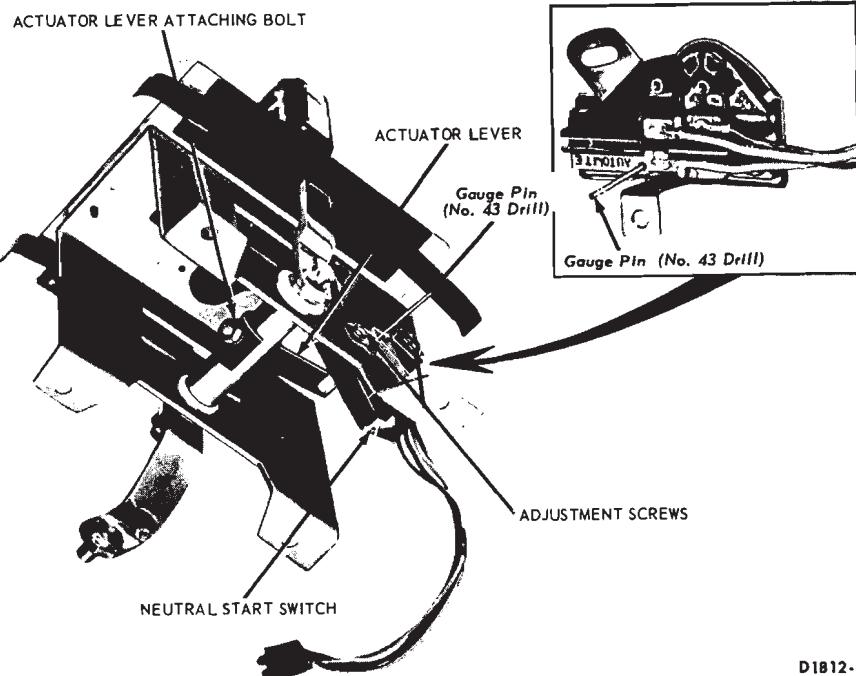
Neutral Start Switch Adjustments—Console or Floor Shift—Ford-Mercury and Meteor
